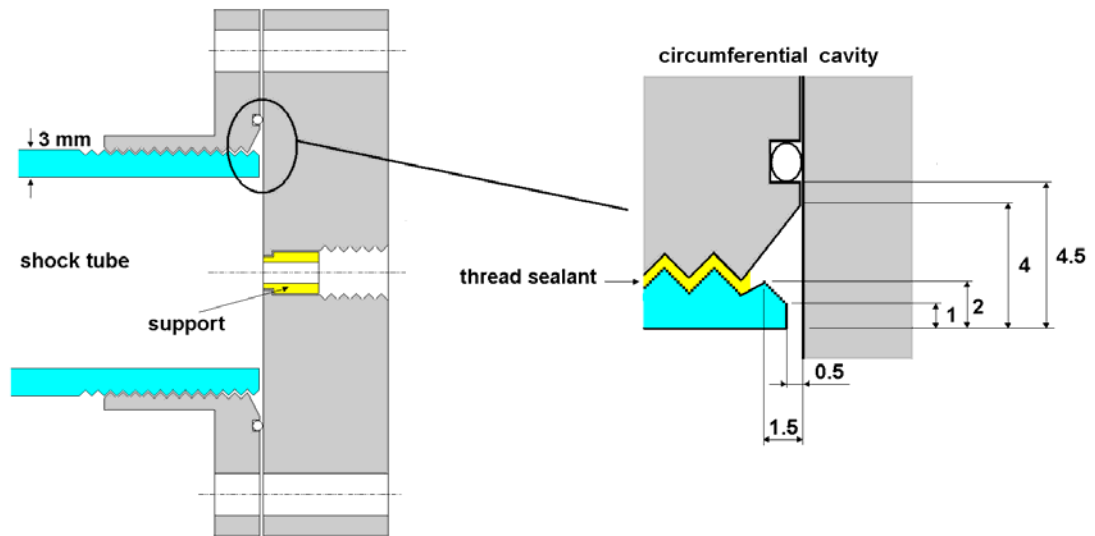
Illustration of shock tube end plate arrangement. Dimensions in mm.
